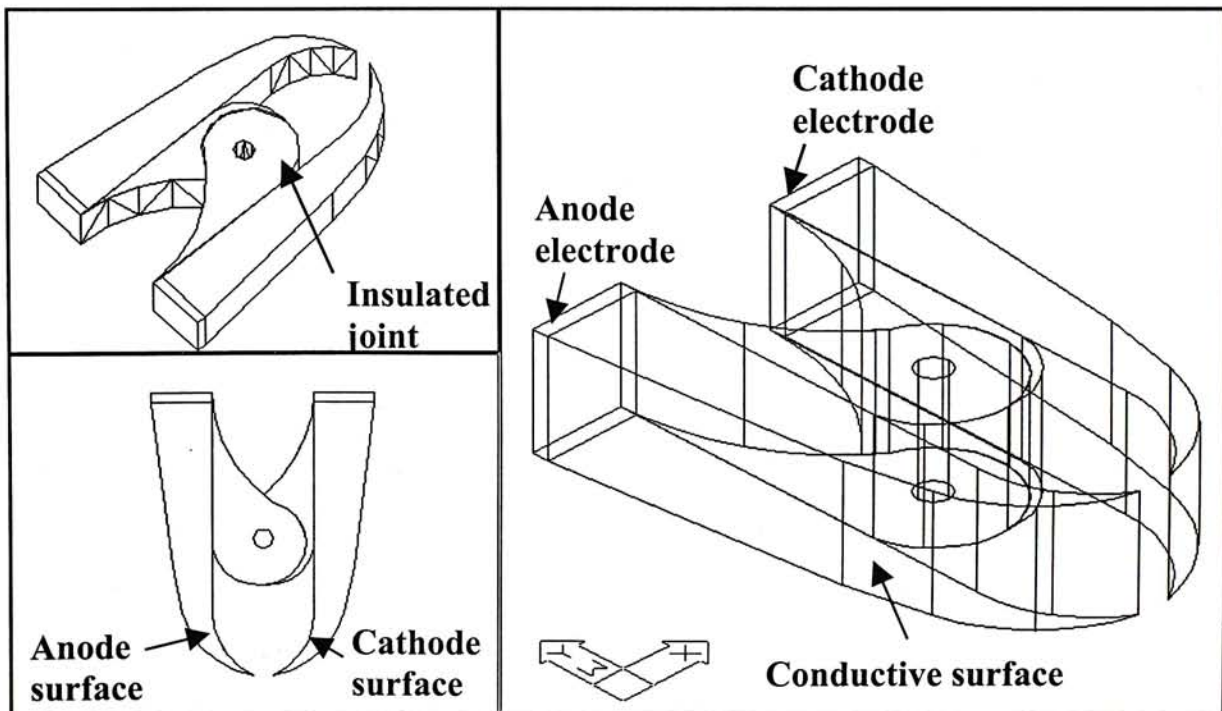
3-D view and plane view showing the mechanism of an ICPF testing clamp.
